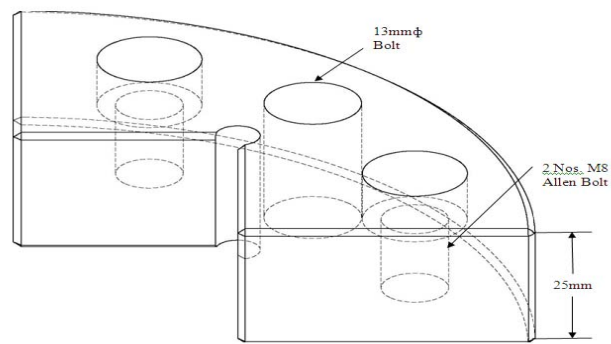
(c) Dimension of the projection of extrusion chamber
